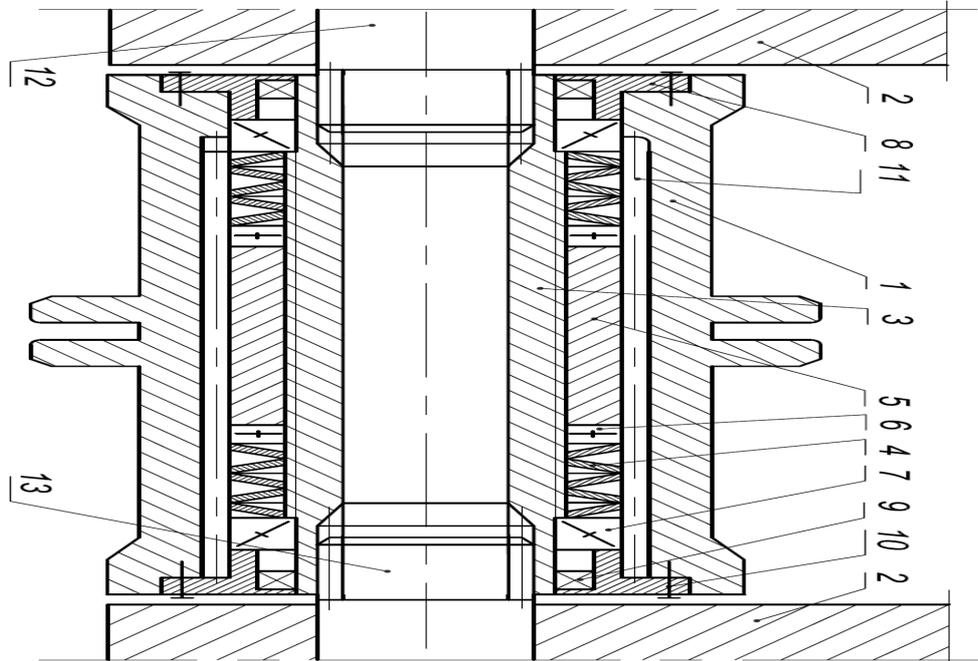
The example of solution of the constructional driving drum integrated with the flexible torsional coupling, where: 1 – casing of the driving drum, 2 – elements of the frame of drive of curry-comb conveyor, 3 – shaft of driving drum, 4 – disk springs, 5 – nut with notched internal thread and splines, 6 – thrust bearings, 7 – cone bearing, 8 – cover of the drum, 9 – seal, 10 – screws, 11 – splines connection, 12 – drive shaft of gear, 13 – half axle of drive
